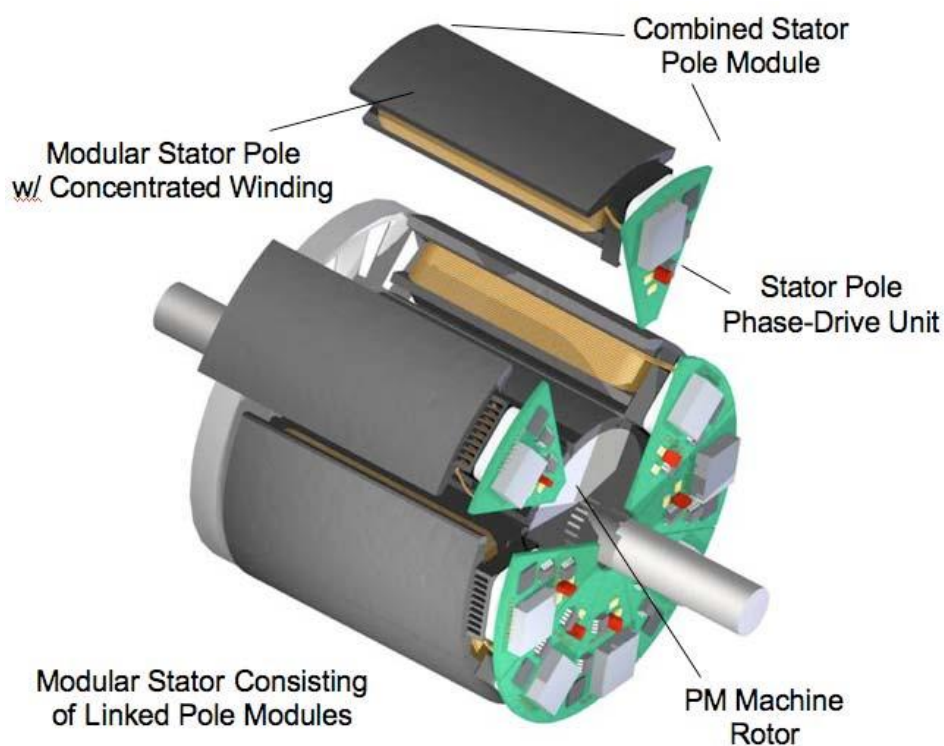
Rendered views of 5-phase SMC modular motor drive.
